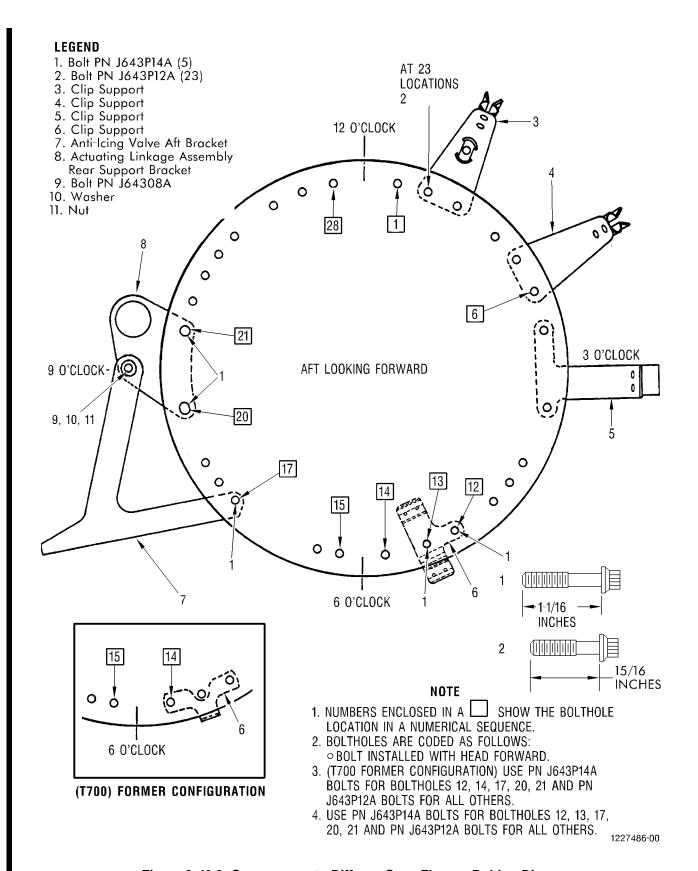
Compressor-to-Diffuser Case Flange; Bolting Diagram
